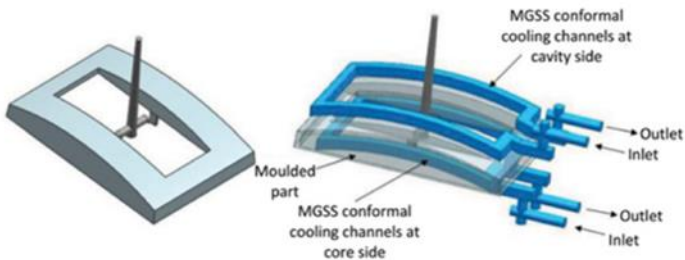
Milled Groove Square Shape Method (MGSS) part [14]
